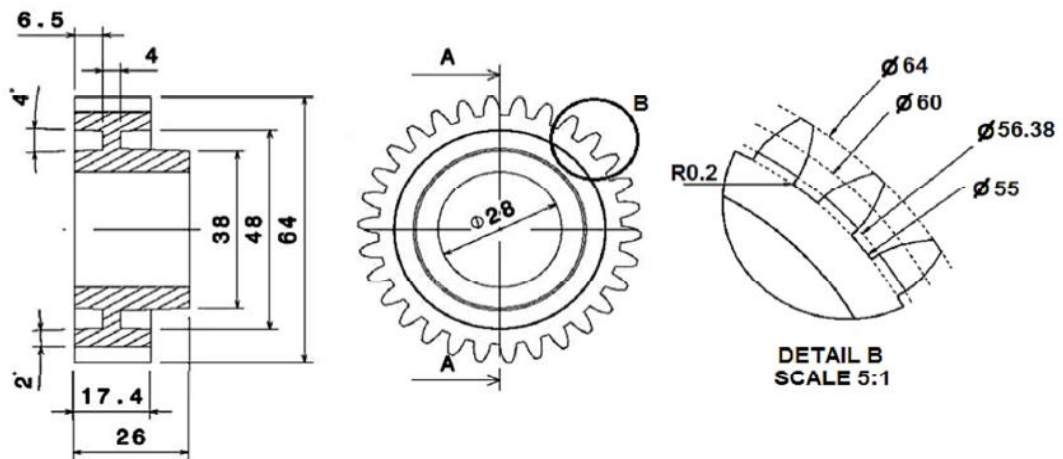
Birmingham standard gear 20° pressure angle[84].
